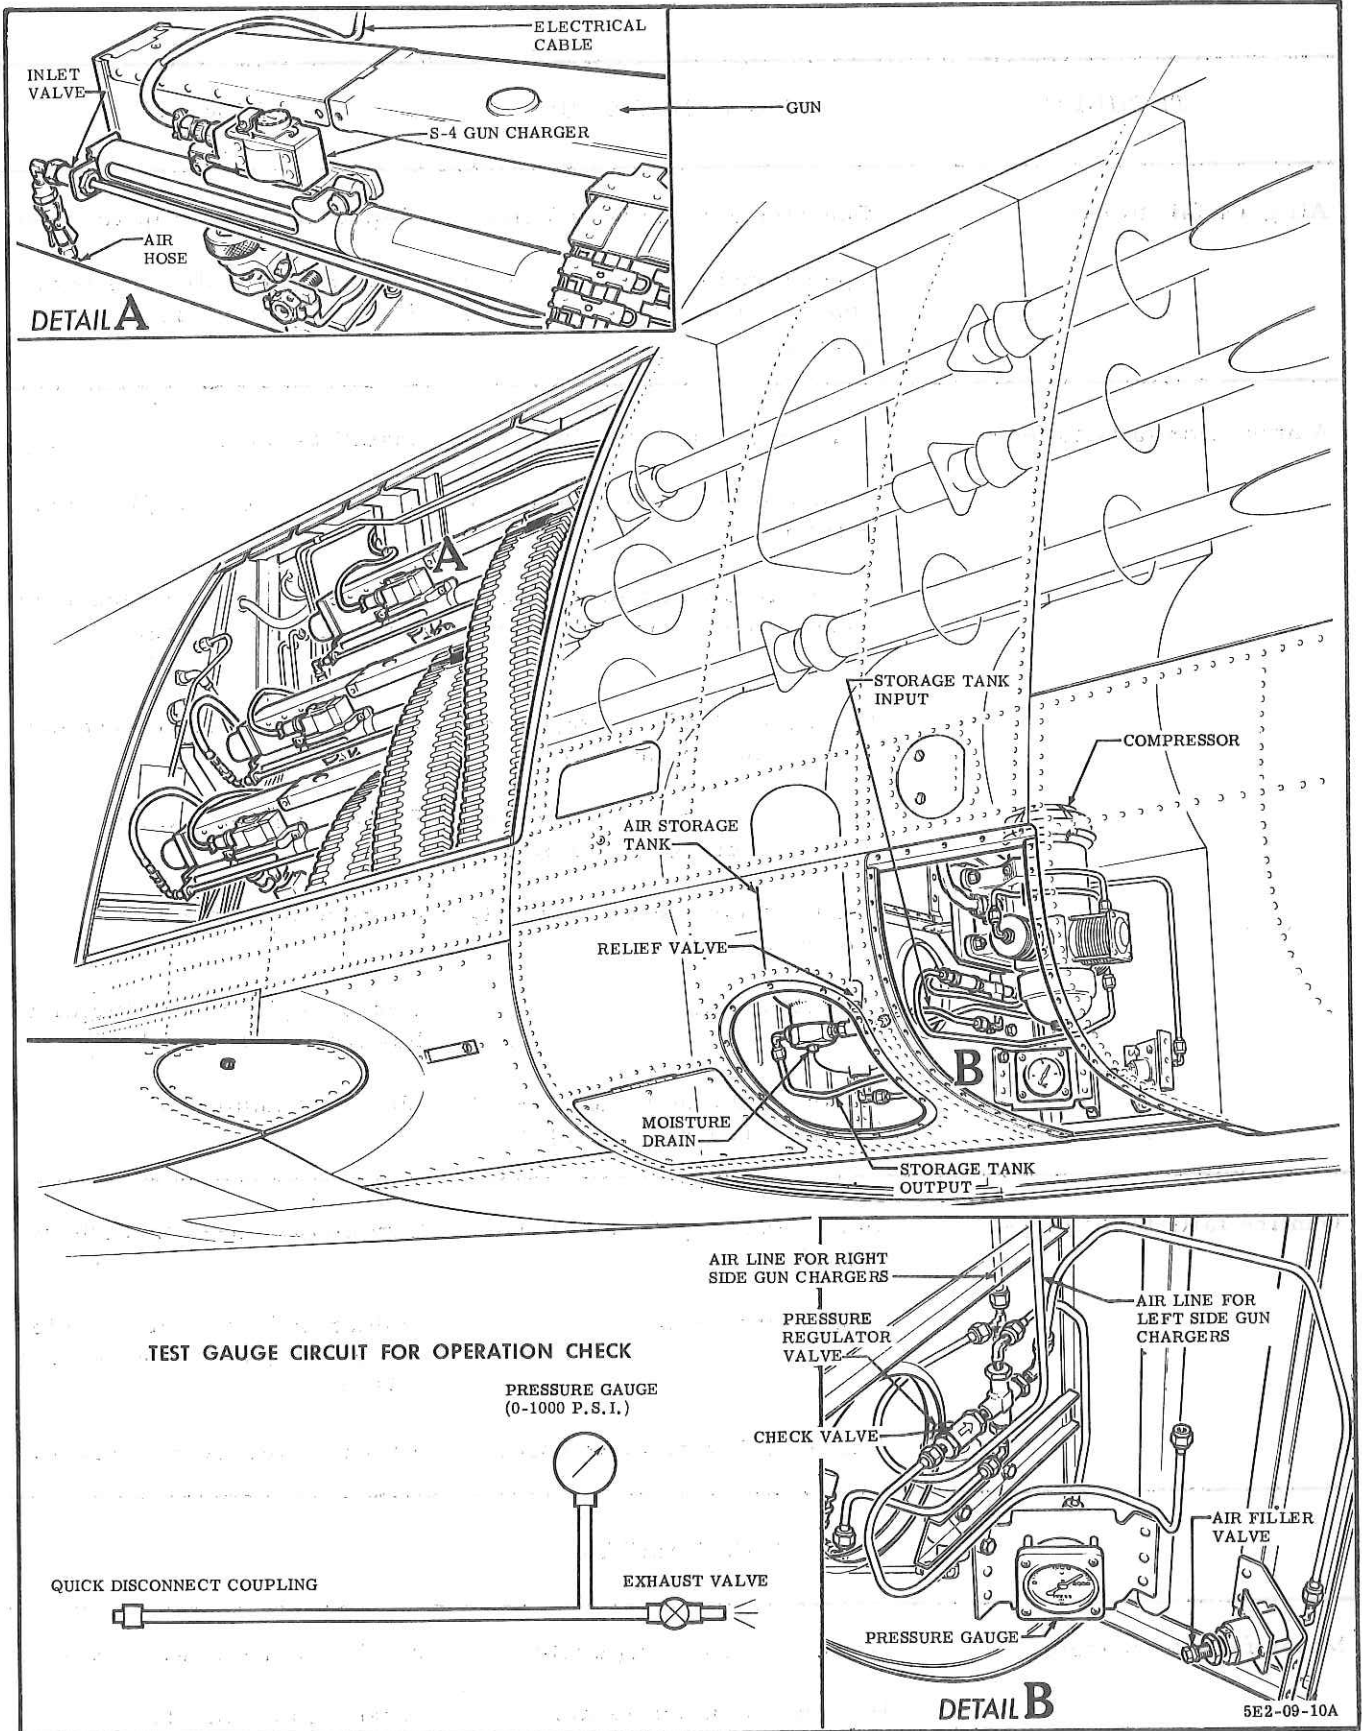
(Sheet 2 of 2) Gun Installation Details
